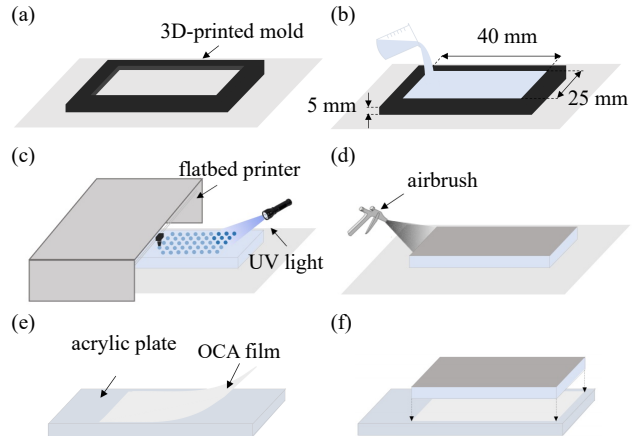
Elastomer fabrication process: (a) prepare 3D-printed mold, (b) pour clear silicone rubber, (c) print UV markers using flatbed printer, (d) coat the reflective membrane using airbrush, (e) attach OCA film to acrylic plate, and (f) attach coated elastomer on the OCA film.
